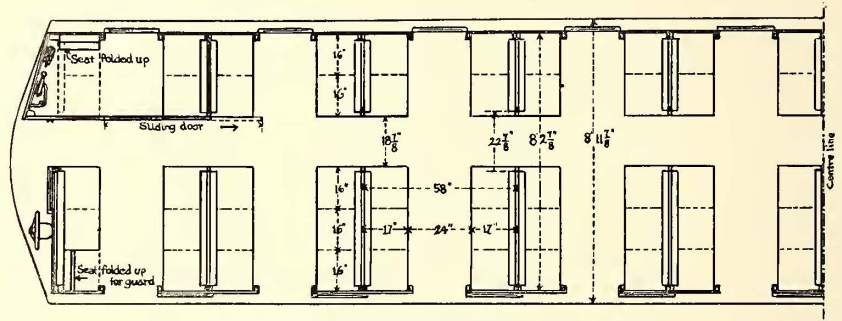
TYPE 4500. MOTOR CAR, 100 SEATS
